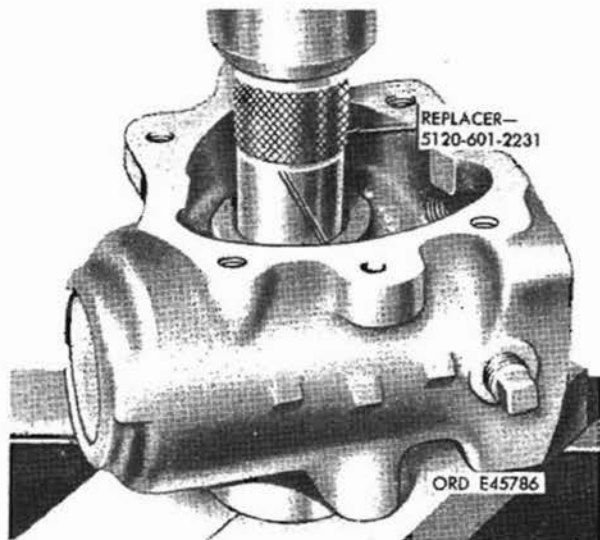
Installing inner lever shaft bearing using replacer - 5120-601-2231.
